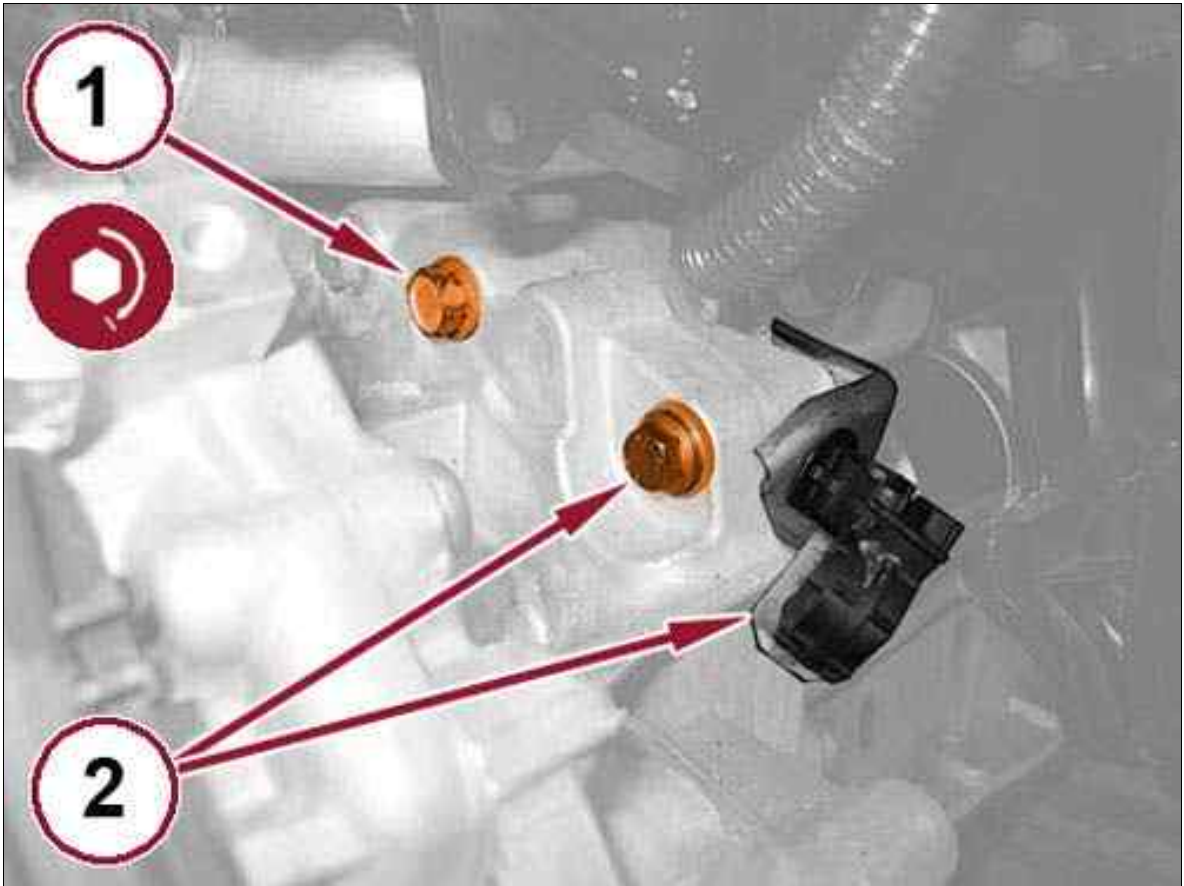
Starter Motor Wire Harness Connector & Lower Starter Bolt
